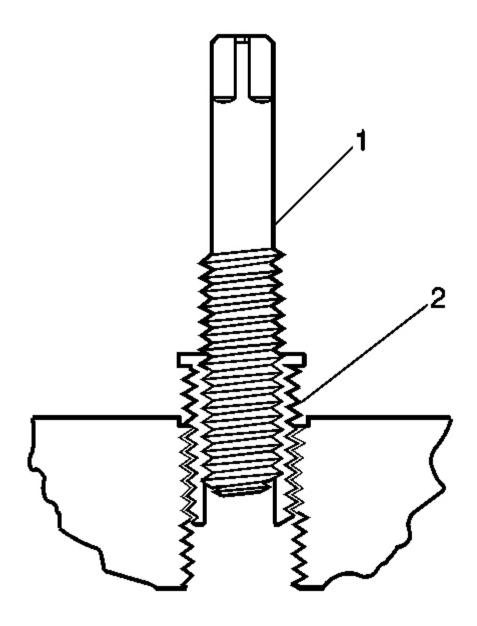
Installing Insert Into Tapped Bolt Hole Courtesy of GENERAL MOTORS CORP.
